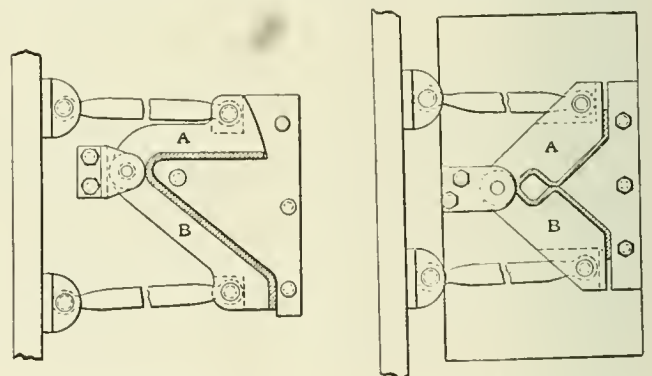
FORMER FOR RUNNING-BOARD BRACKET.
